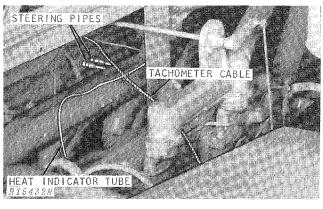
Steering Lines, Tachometer Cable, and Heat Indicator Tube
